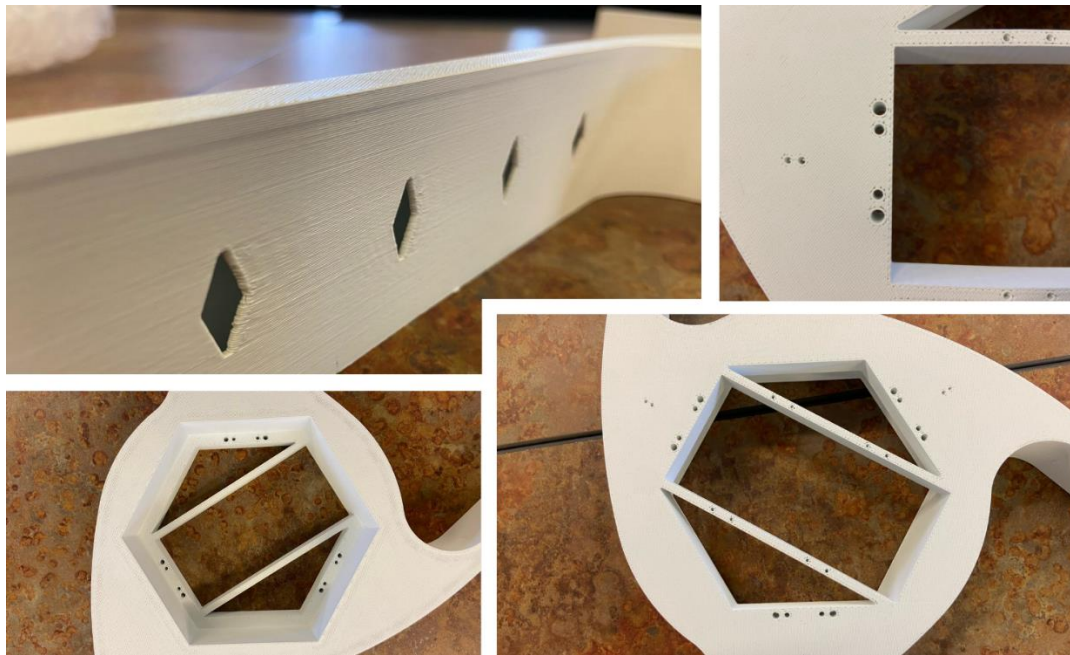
Closer View of Xometry 3D Printed ASA Model Showing All Mounting and Vent Holes.
